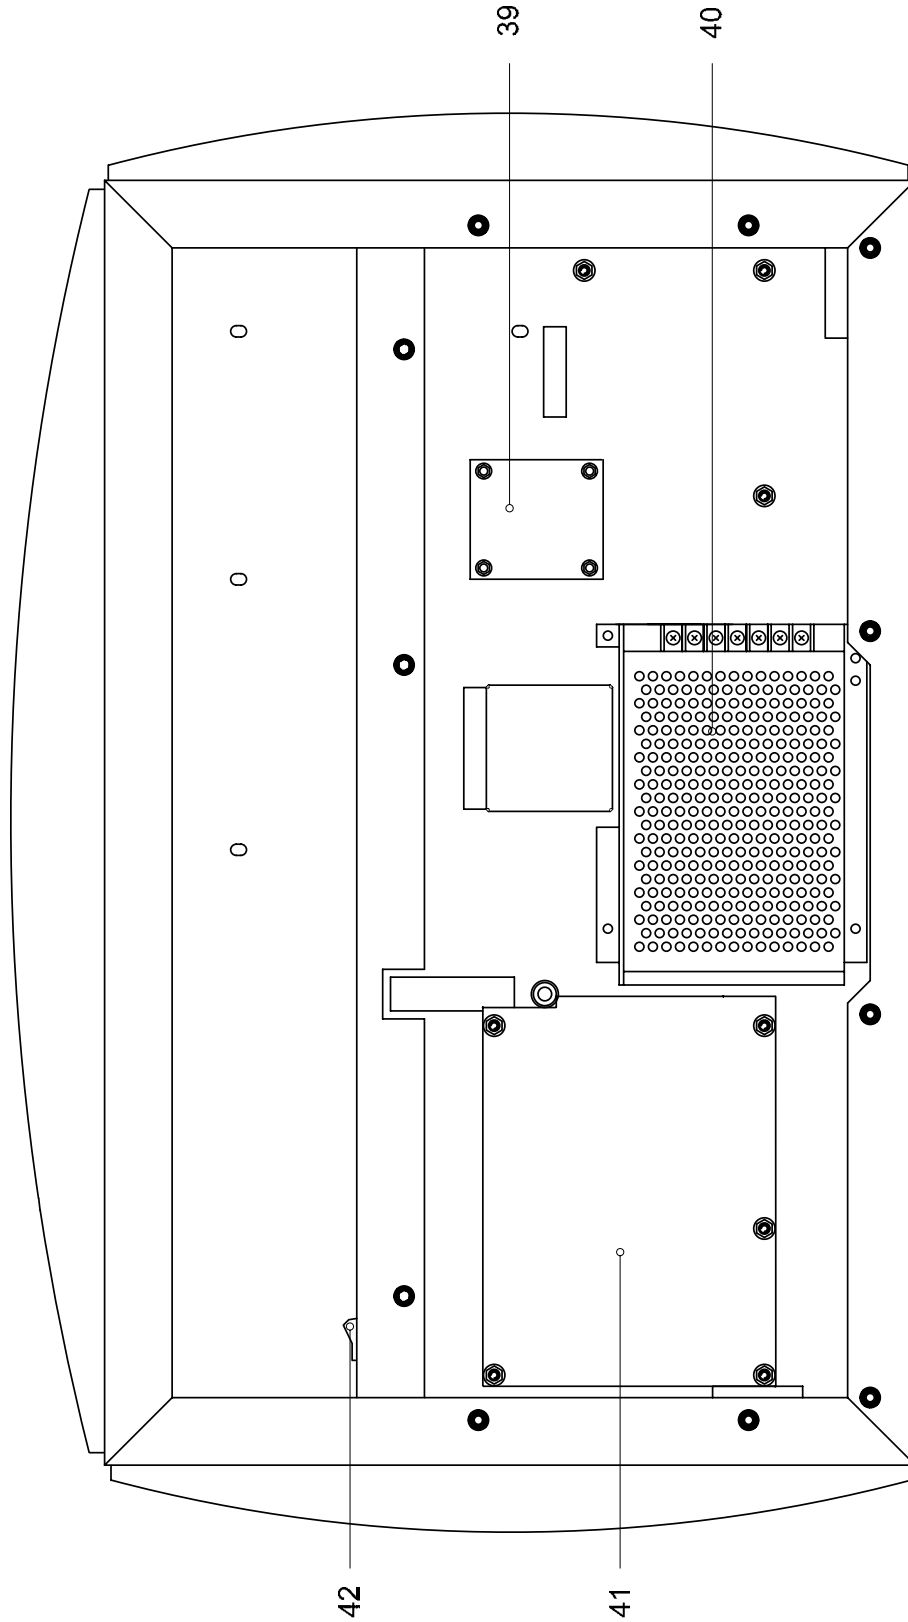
Layout of UV-2802(S), UV-2802PC(S) Inside Bottom View
